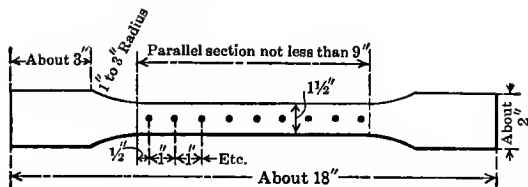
Wrought iron, structural steel and boiler plate. Plate metal in general.
